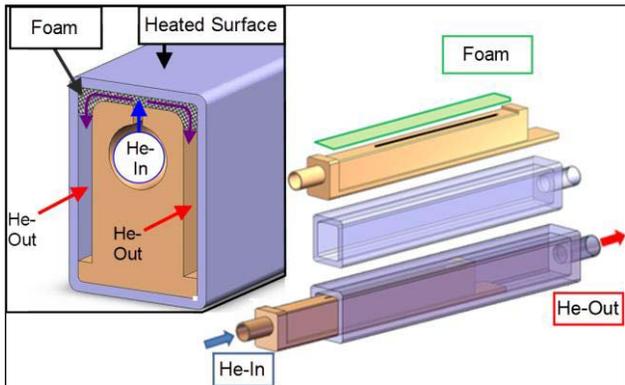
Cross-sectional (left) and exploded (right) view of "azimuthal He-Flow through Foam in Tube" HX design concept.⁸
